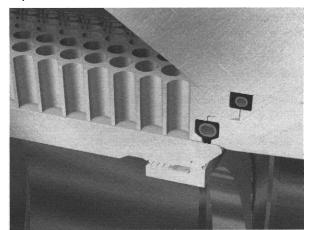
A high pressure axial-cage piston seal (patented) Courtesy of Mokveld Valves BV
